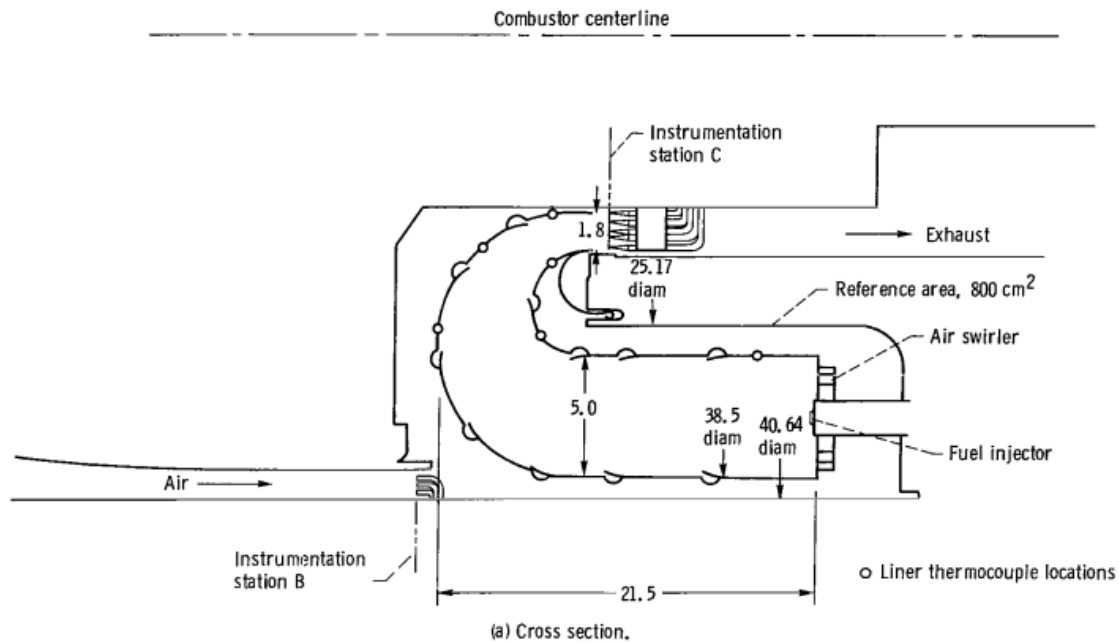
NASA combustor with main dimensions (Ref.: [28])
